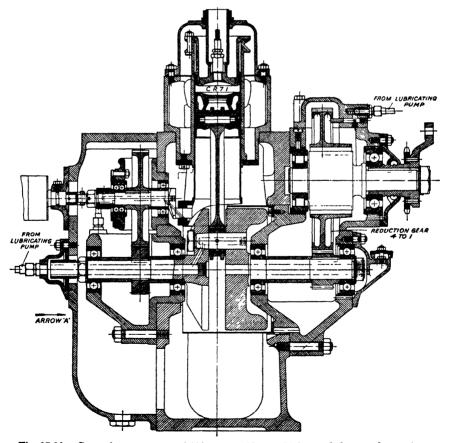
General arrangement of 684 mm. × 90 mm. high-speed sleeve-valve engine
